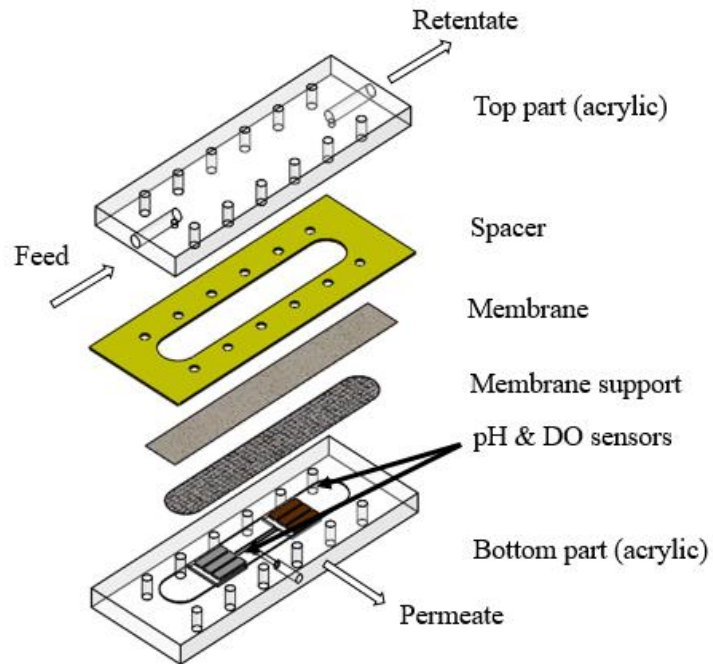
Schematic of the TFF assembly showing different parts of the filtration device and the pH and DO sensors integrated in the bottom part of the device
